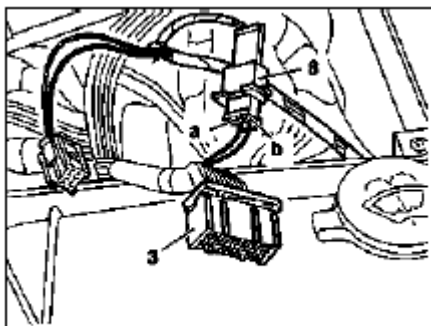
Identifying Relay Module, AAV Module And Connector
